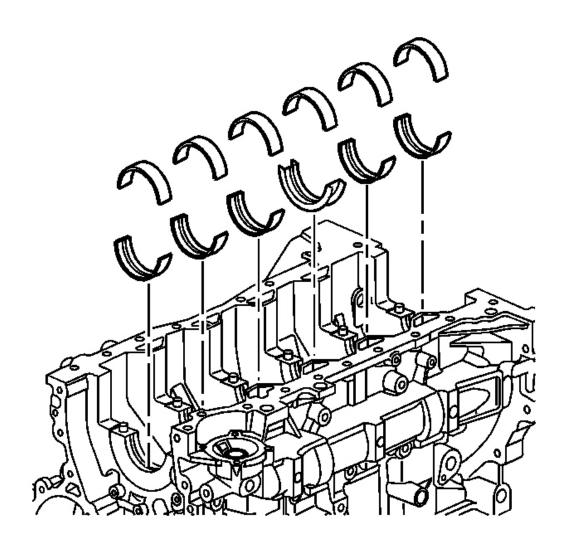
View Of Crankshaft Bearing Inserts Courtesy of GENERAL MOTORS CORP.
